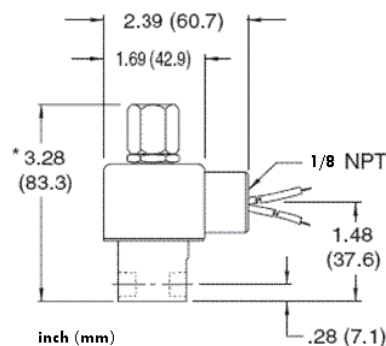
PETER PAUL series 20 - model 24 Solenoid Valve - Physical Dimensions [6]
